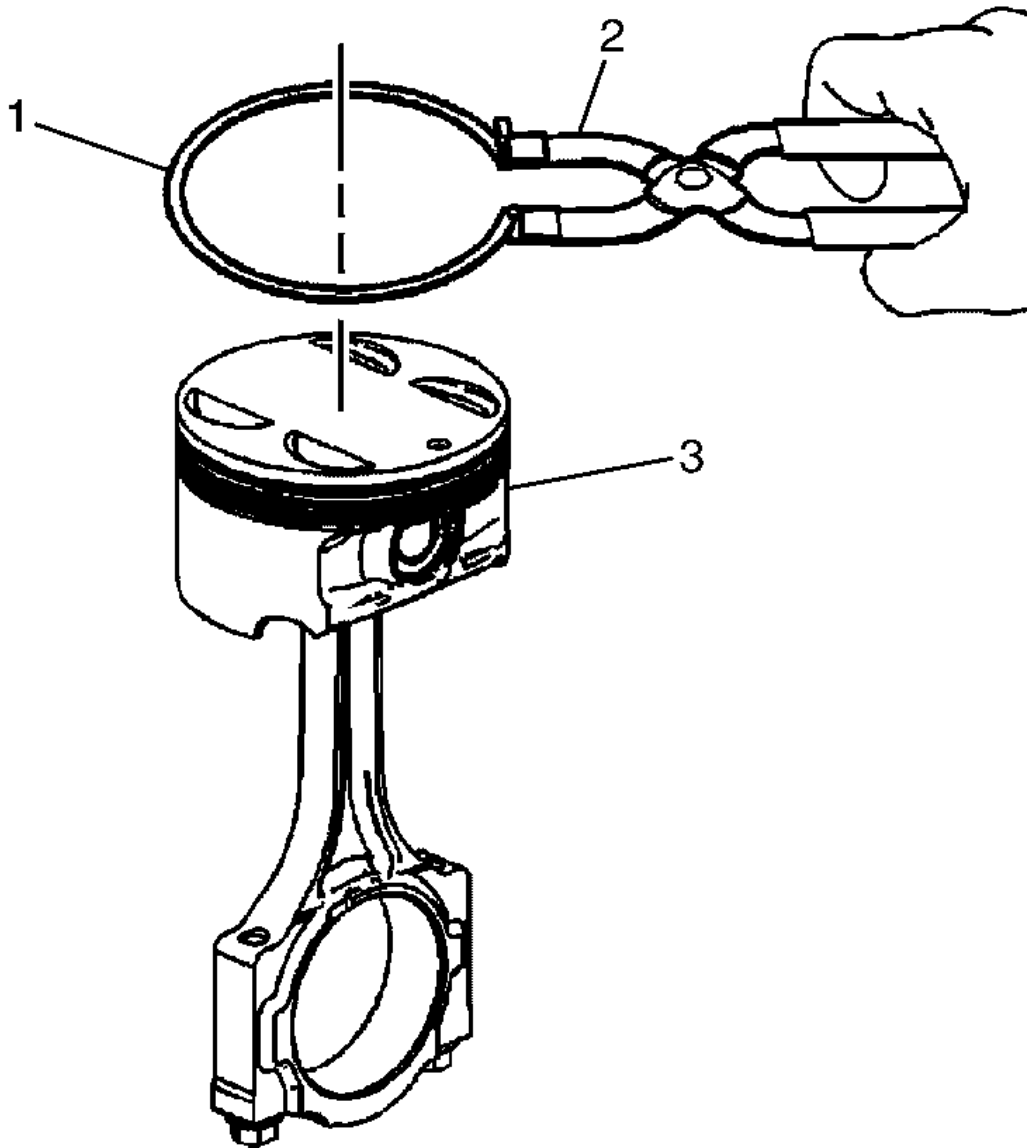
Identifying Expander & Oil Scraper Rings
